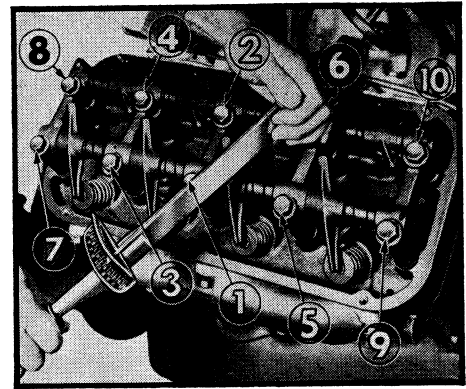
Cylinder head tightening sequence. Double rocker arm V8 engine. 1954-58
